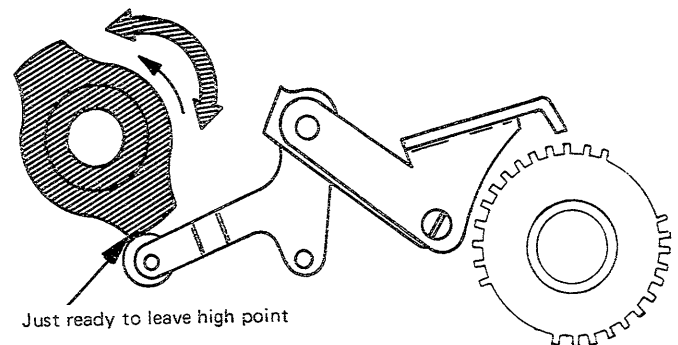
Shift-Interlock Cam (15-Inch Machines with Cycle-Clutch Interlock)
